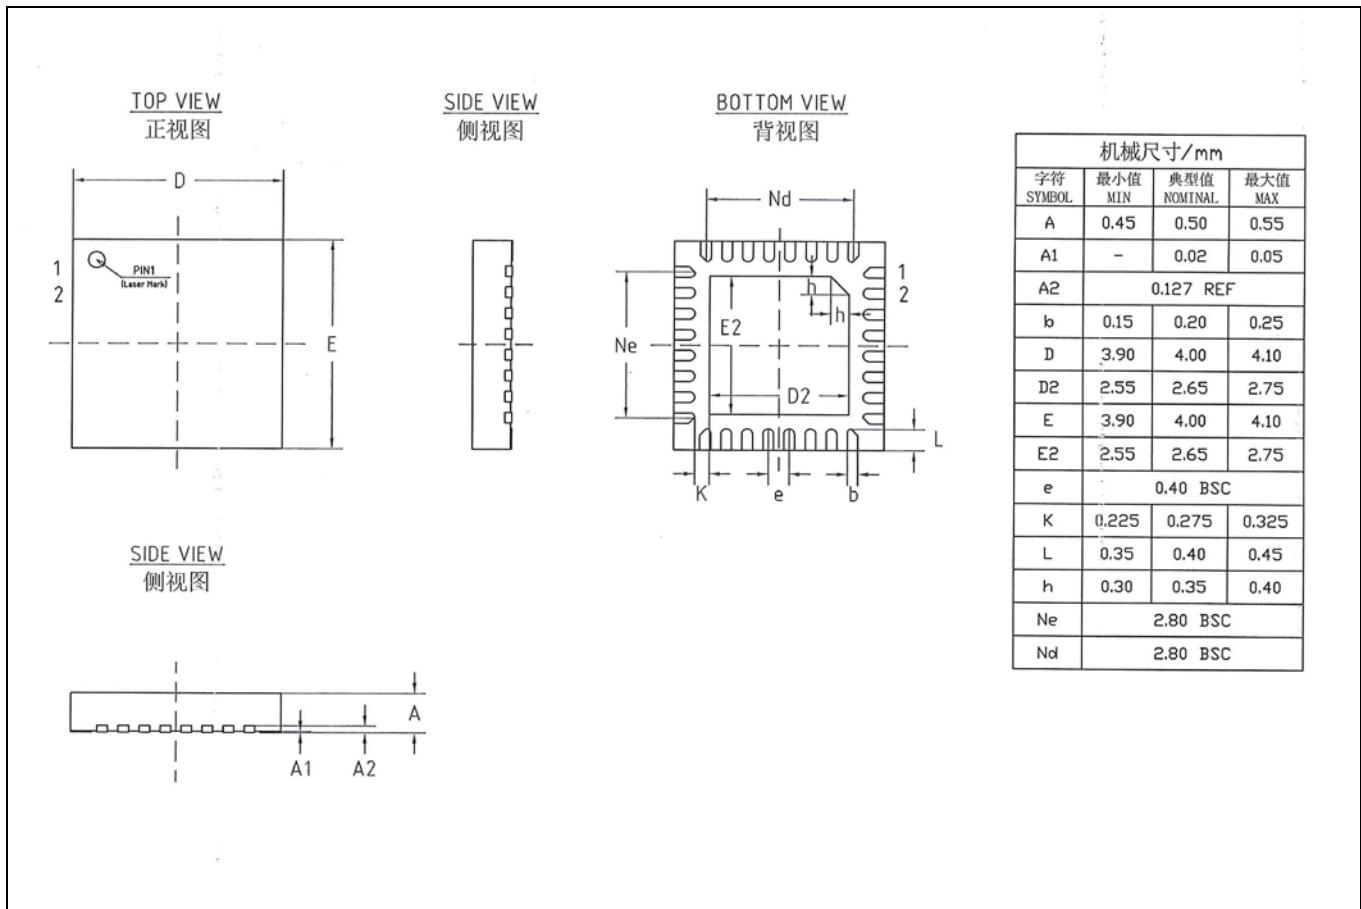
QFN32 (4x4, 0.4mm) Package size
